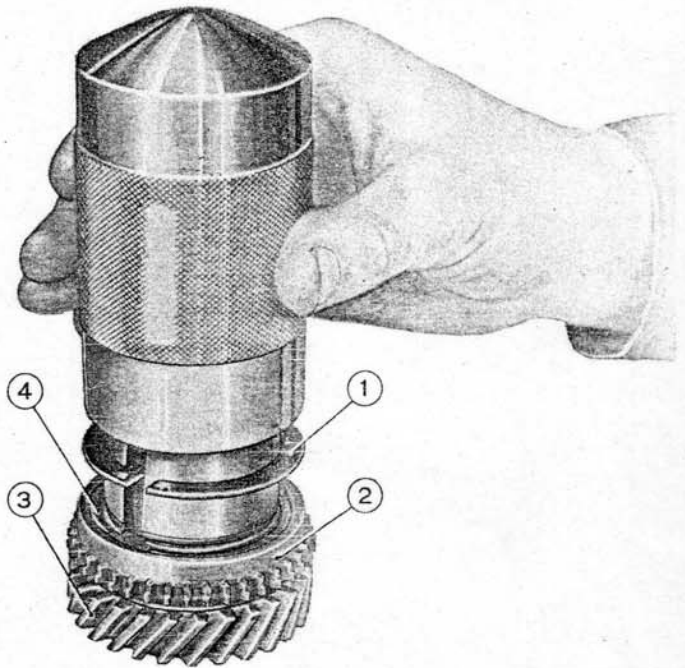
Using tool A. 70161 to install the synchronizer snap ring.
